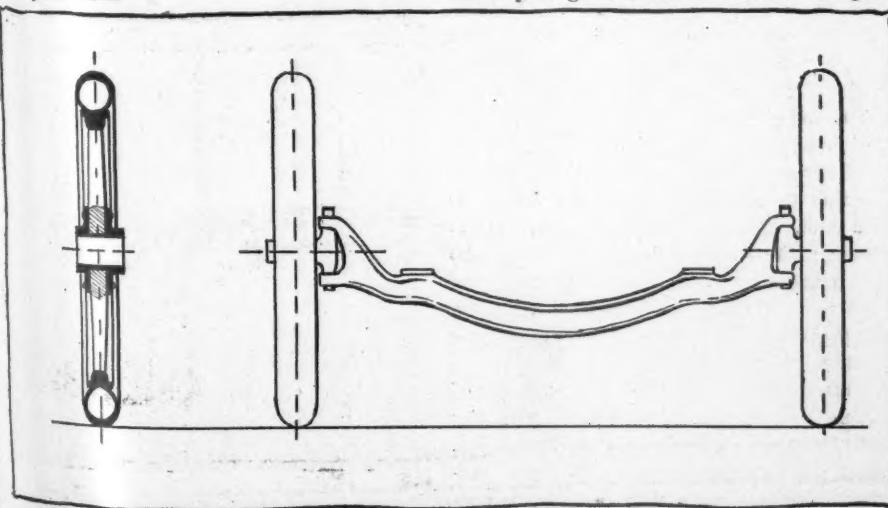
MOTOR CAR WHEELS, ARTILLERY TYPE, ON STRAIGHT SPINDLES
